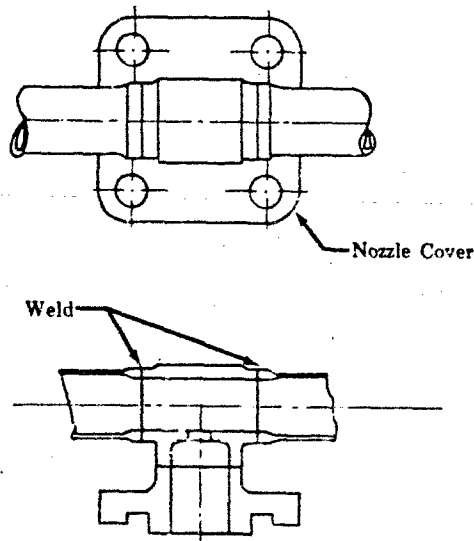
Welded "Flowthrough" Nozzle Covers
